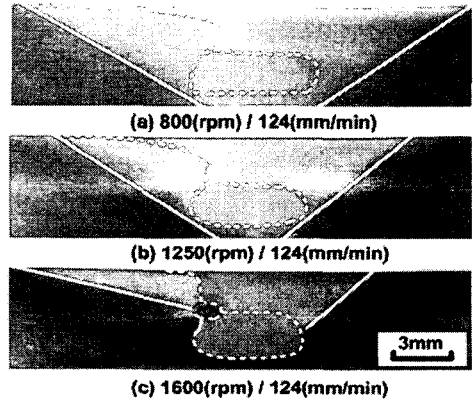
Macrostructure of cross-section welded by half screw type tool at the conditions of 800, 1250 and 1600rpm with 124mm/min speed
